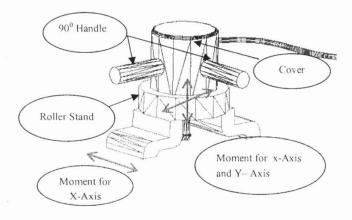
Drawing for Portable Steel's Chamfer Machine
